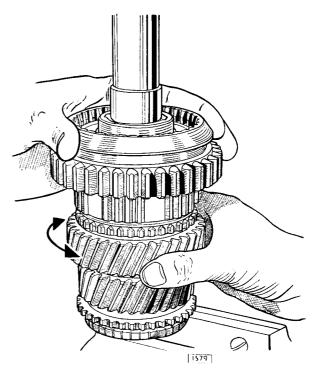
With 1st gear engaged and slight downward pressure on the synchro assembly the 2nd speed gear should be free to rotate.
